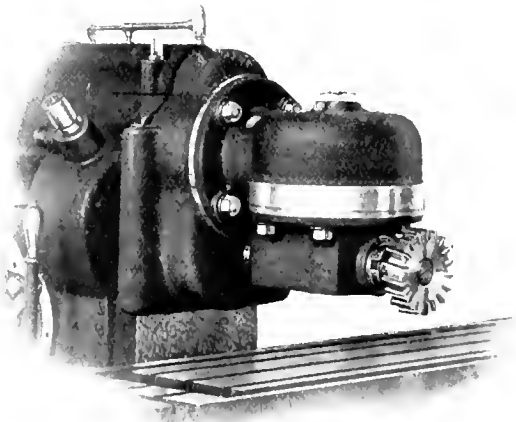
Using the Attachment for Horizontal Milling at a Slight Angle with the Axis of the Main Spindle
